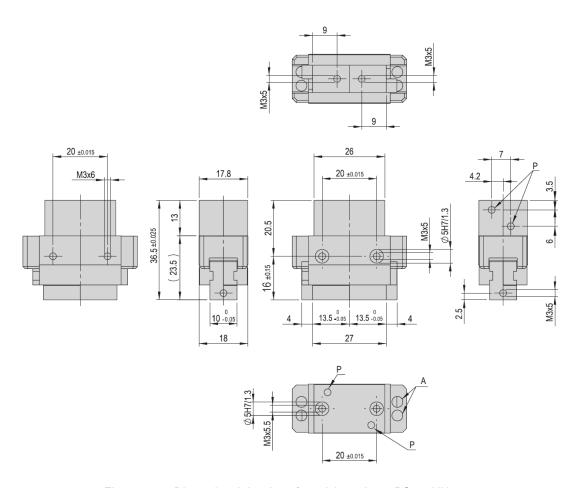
Dimensional drawing of precision gripper PG 16 NN
